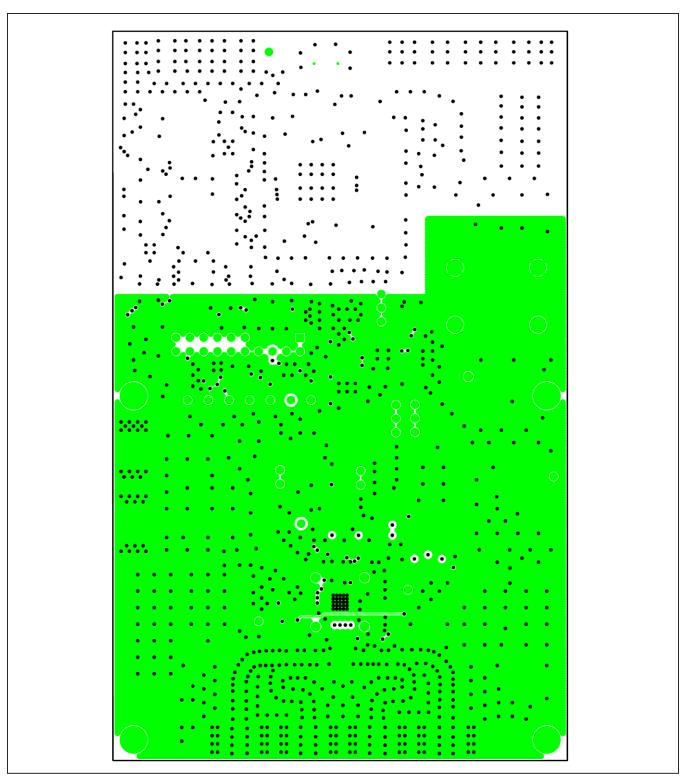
MAX2870/MAX2871 EV Kit PCB Layout—3rd Layer
